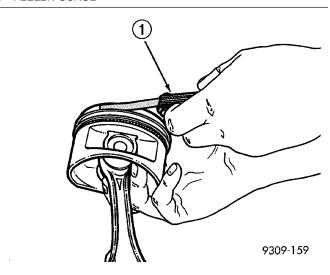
Measuring Piston Ring Side Clearance 1 - FEELER GAUGE
